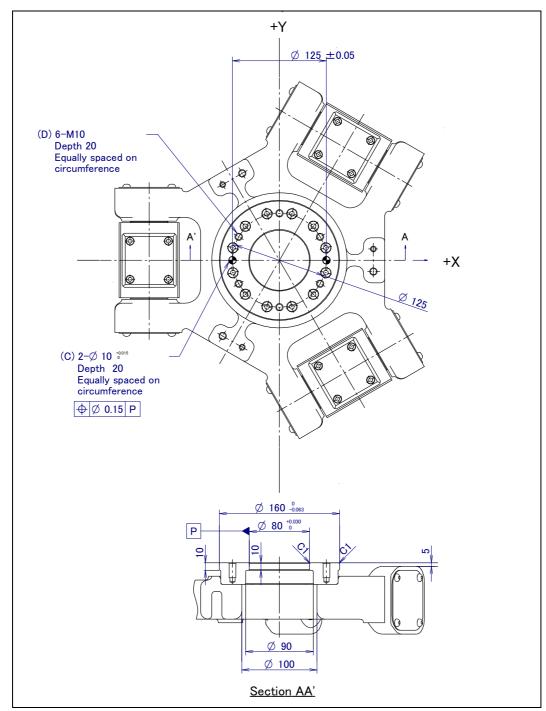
(c) End effector mounting face (ISO flange-not insulated)
